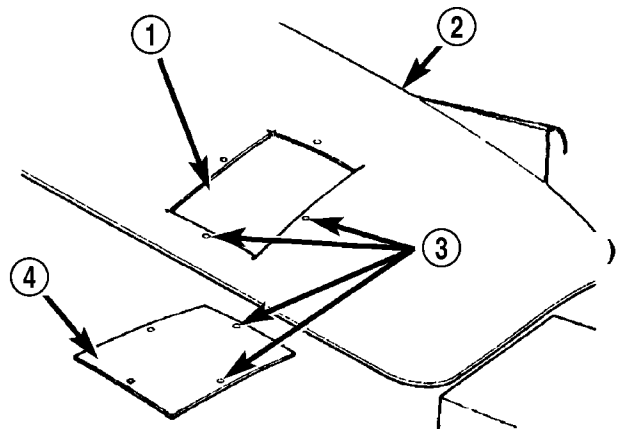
DAMAGED PANEL CUTOUT AND PATCH
